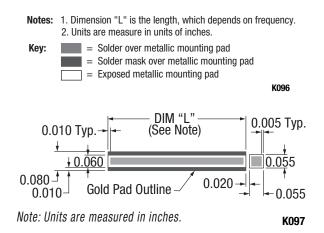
2 mm (SM) Coaxial Resonator Footpad Dimensions
